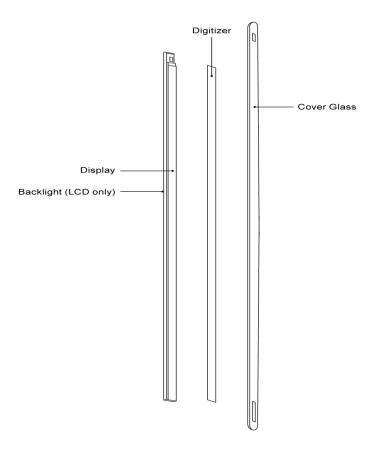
Top to Bottom Side View of Display Assembly
